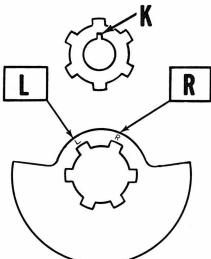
When rotary valve is installed on left side, L stamped on valve should be aligned with key slot (K) in splined collar. When used on right side, R stamped on valve should be aligned with key slot.
